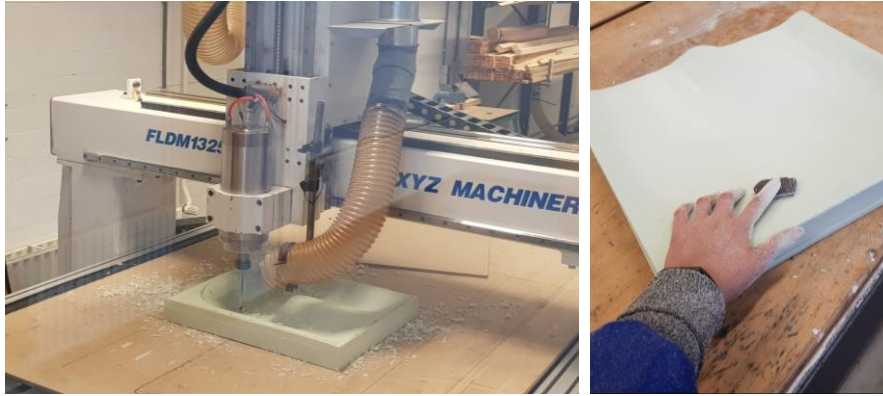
Process of printing with CNC machine and smoothing surfaces
